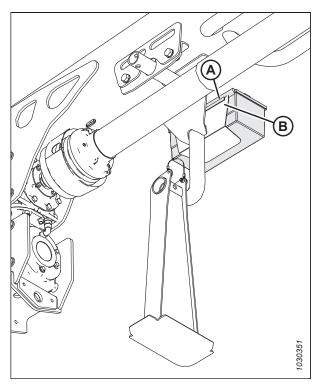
Toolbox Mounted on Jack Stand Bracket
